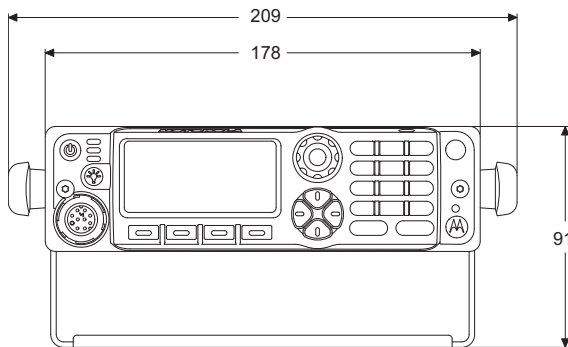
Front View of O7 Control Head with Remote Mount and Trunnion
